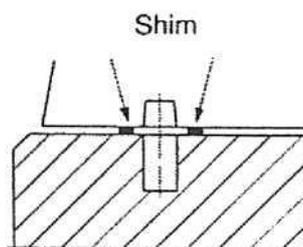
Fitting shims Uniformly tighten up the bolts.
